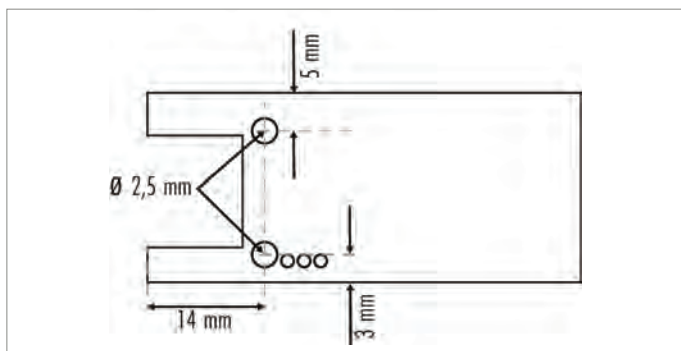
Drilling through circuit traces on a universal board, batteries inserted
